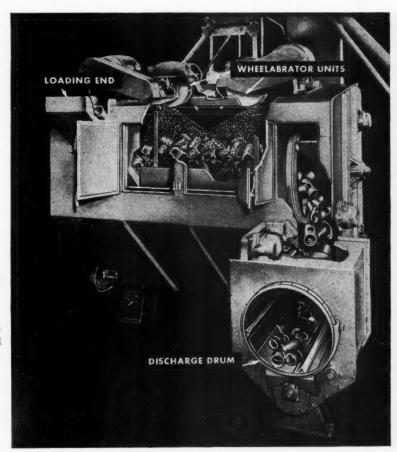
Continuous barrel-type machine for airless abrasive blasting fairly uniform-sized parts.
